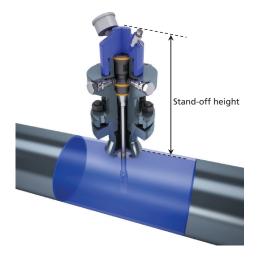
Drawing of a hydraulic access fitting configuration. A solid plug assembly fitted with a coupon holder and two strip corrosion coupons is inserted into the main line through a flanged access fitting body and branched piping connection. The body is fitted with a heavy-duty pressure-retaining cover and the stand-off height is indicated. Drawing courtesy of Cosasco®
